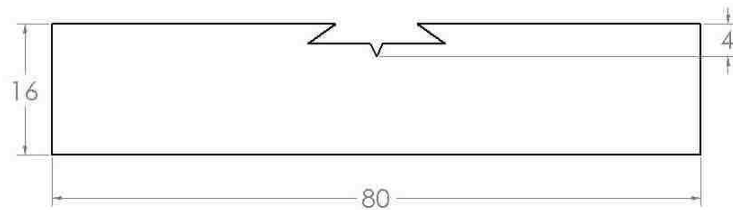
Dimension of fracture toughness bar used for testing. All dimensions are in mm, and the sample is 8mm thick.
